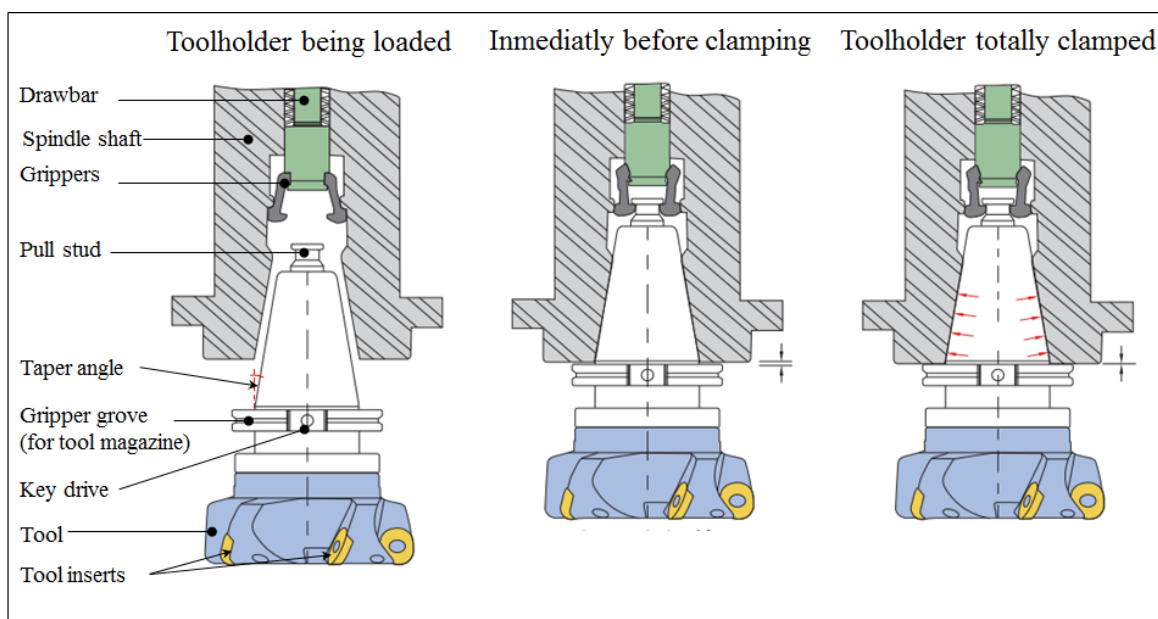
Tooling interface for a tool holder ISO. Adapted from (KENNAMETAL, 2013, p. 18)
